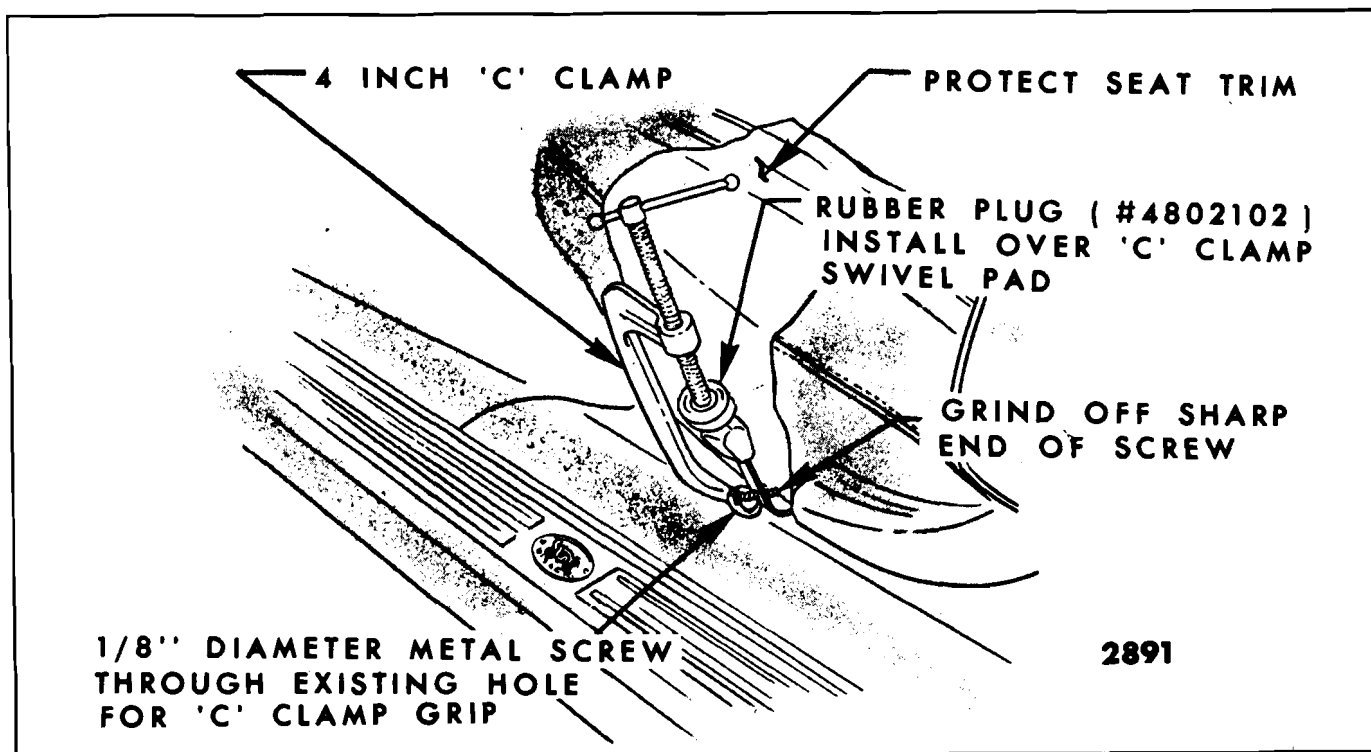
Front Seat Adjuster Control Knob - Installation
